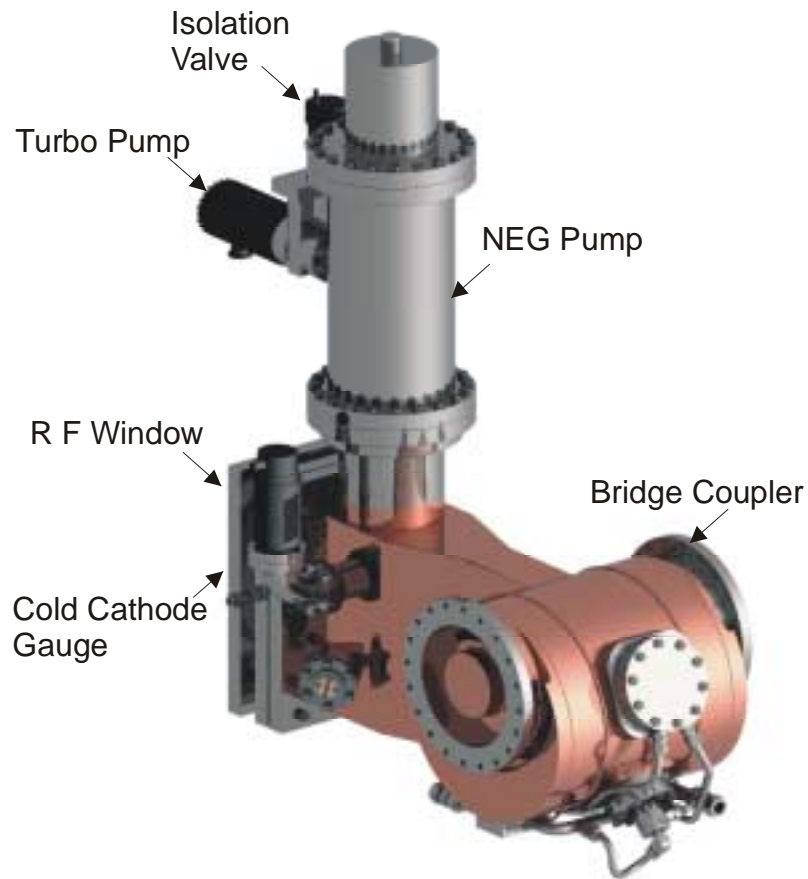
Details of the CCL RF window vacuum pumping assembly.
